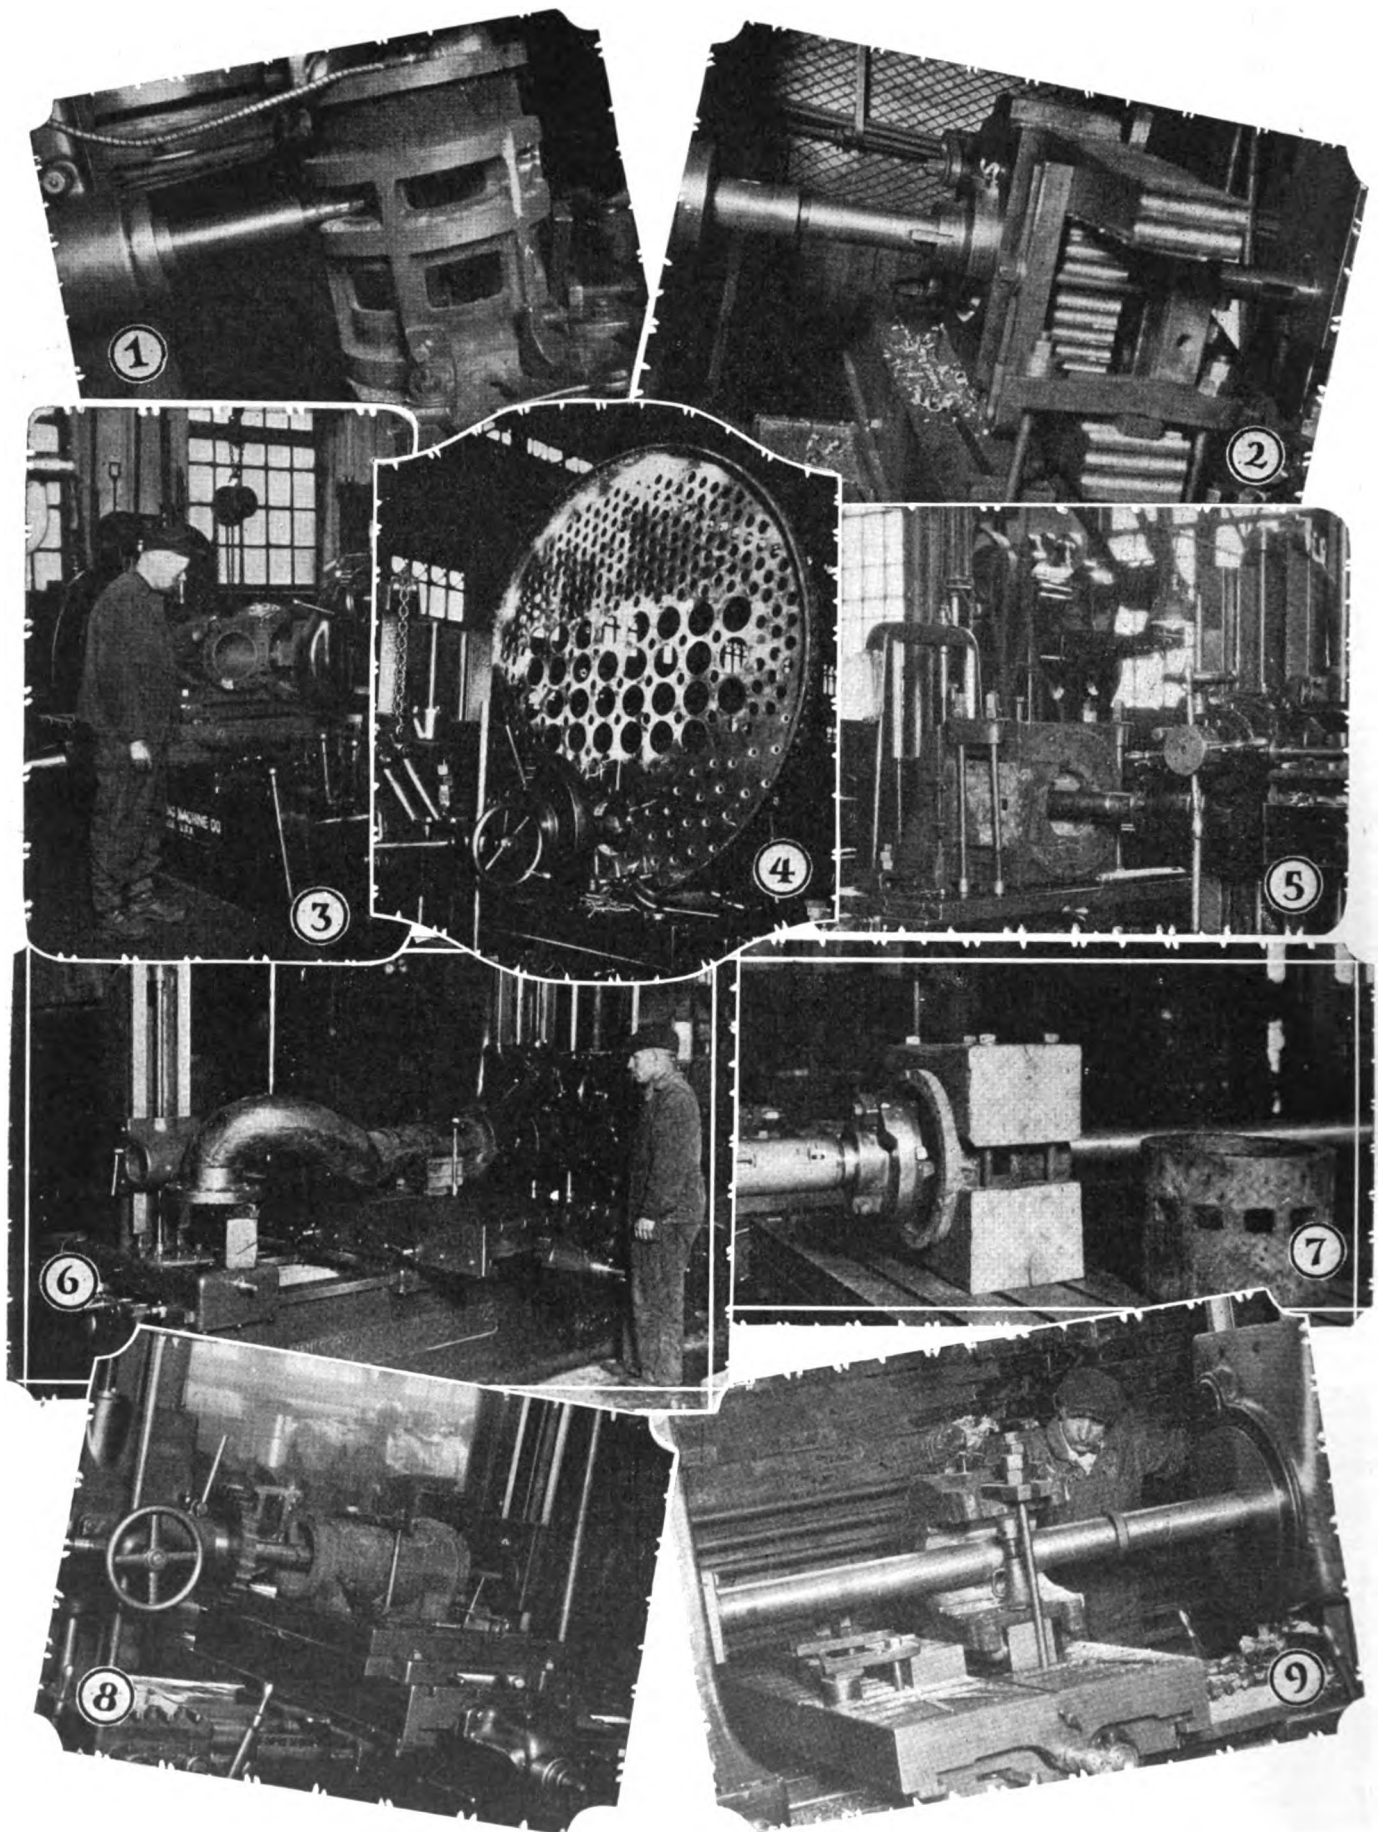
Milling ports in valve bushing; Fig. 2—Boring out crank pin hole in back end main rod strap; Fig. 3—Boring cylinders of cross compound air compressor; Fig. 4—Boring out dry pipe hole in front flue sheet; Fig. 5—Boring out driving box and grease cellar in one operation; Fig. 6—Facing off branch pipe, using a facing attachment; Fig. 7—Boring out valve bushings; Fig. 8—Boring out cylinder of pneumatic pit jack; Fig. 9—Boring driving box crown brass
